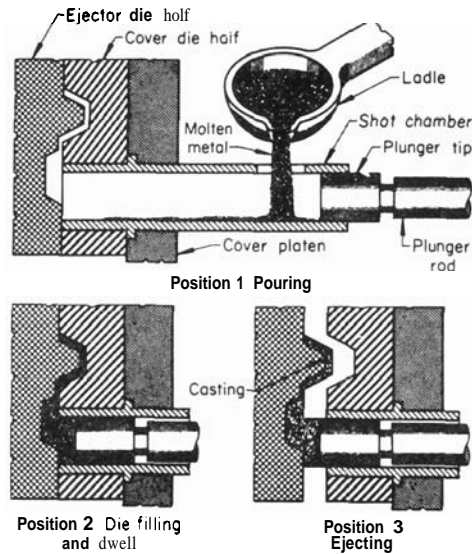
Operating cycle of a horizontal cold-chamber die casting machine (from Ref. 1, p. 286).
